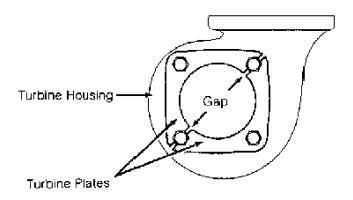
Installing Turbine Plates to Prevent Heat Distortion (MX-6 & 626) Courtesy of Mazda Motors Corp.
